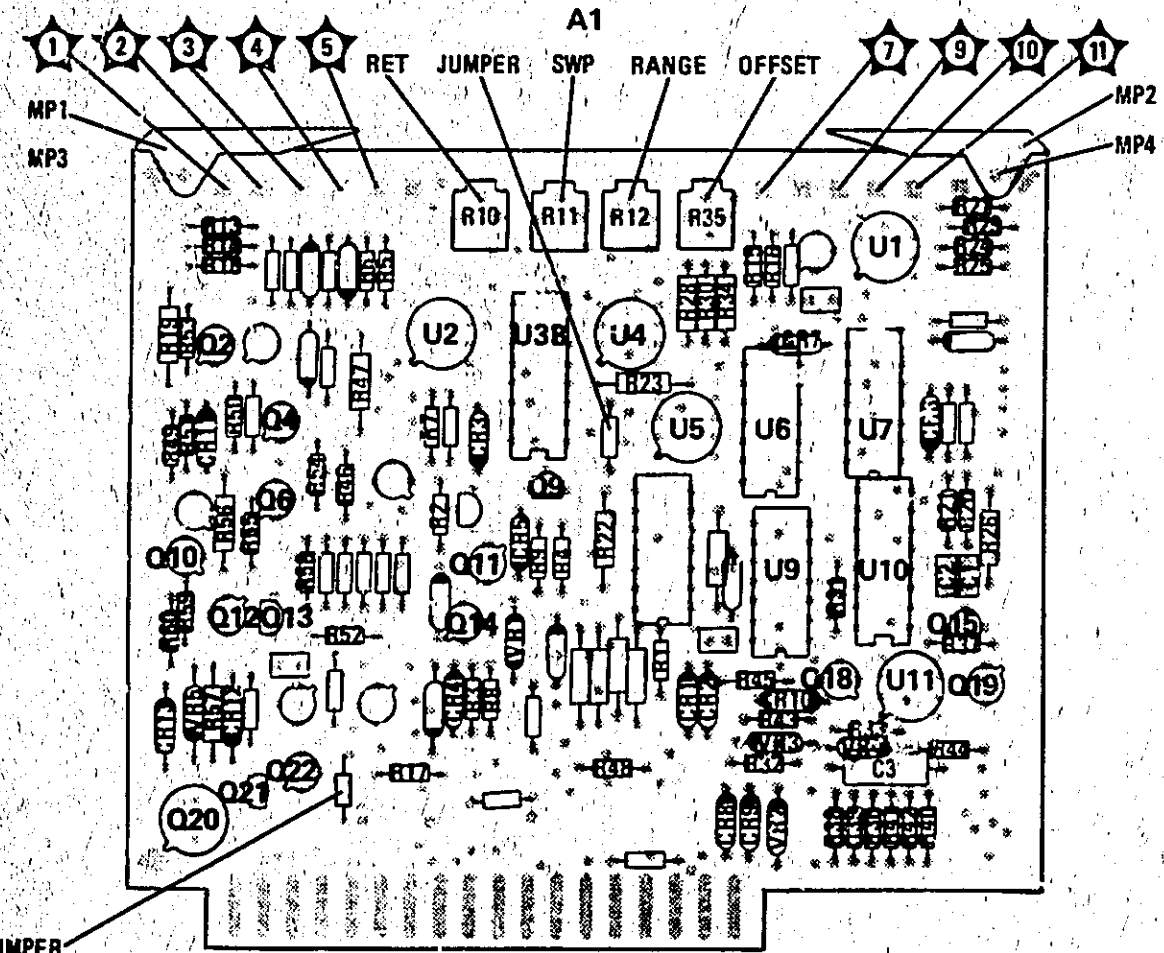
P/O A1 Sweep Generator Assembly, Component Locations
